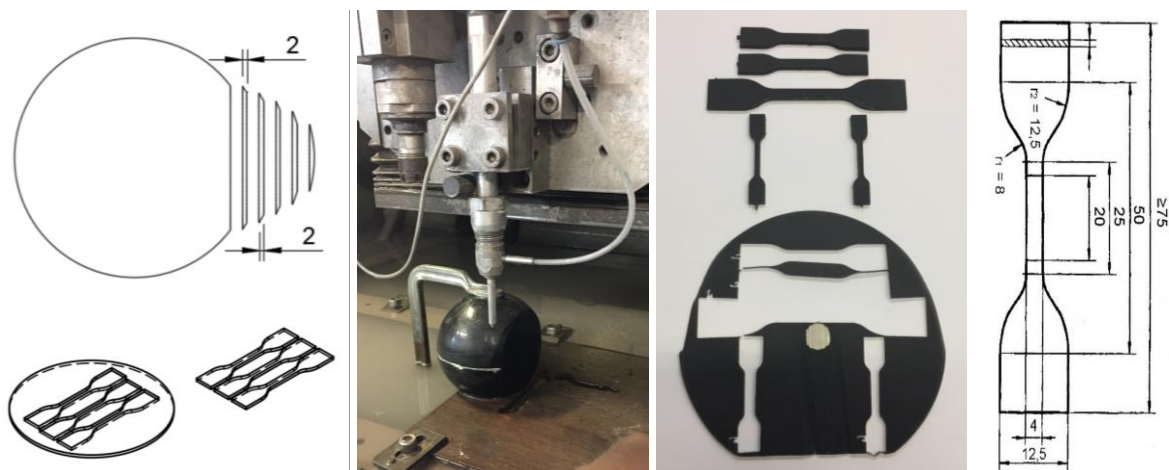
From left to right: i) Cutting drawings, ii) water-jet cutting process, iii) final dumbbell specimens, iv) Type 2 ISO37 specimen. All dimensions in mm.
